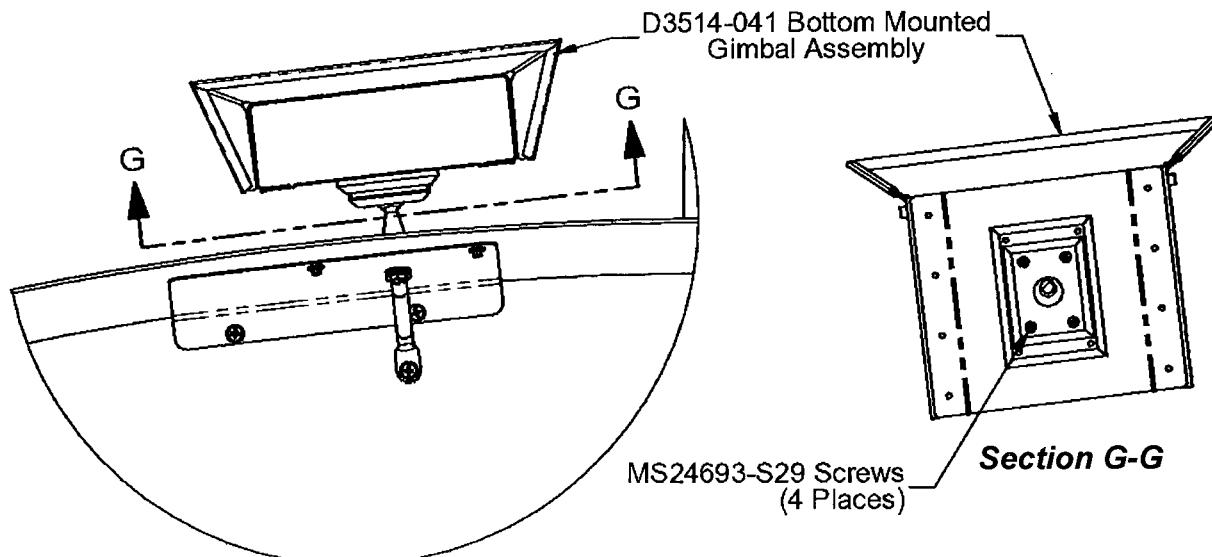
Loosen Screws to Adjust Position of Receiver Housing
